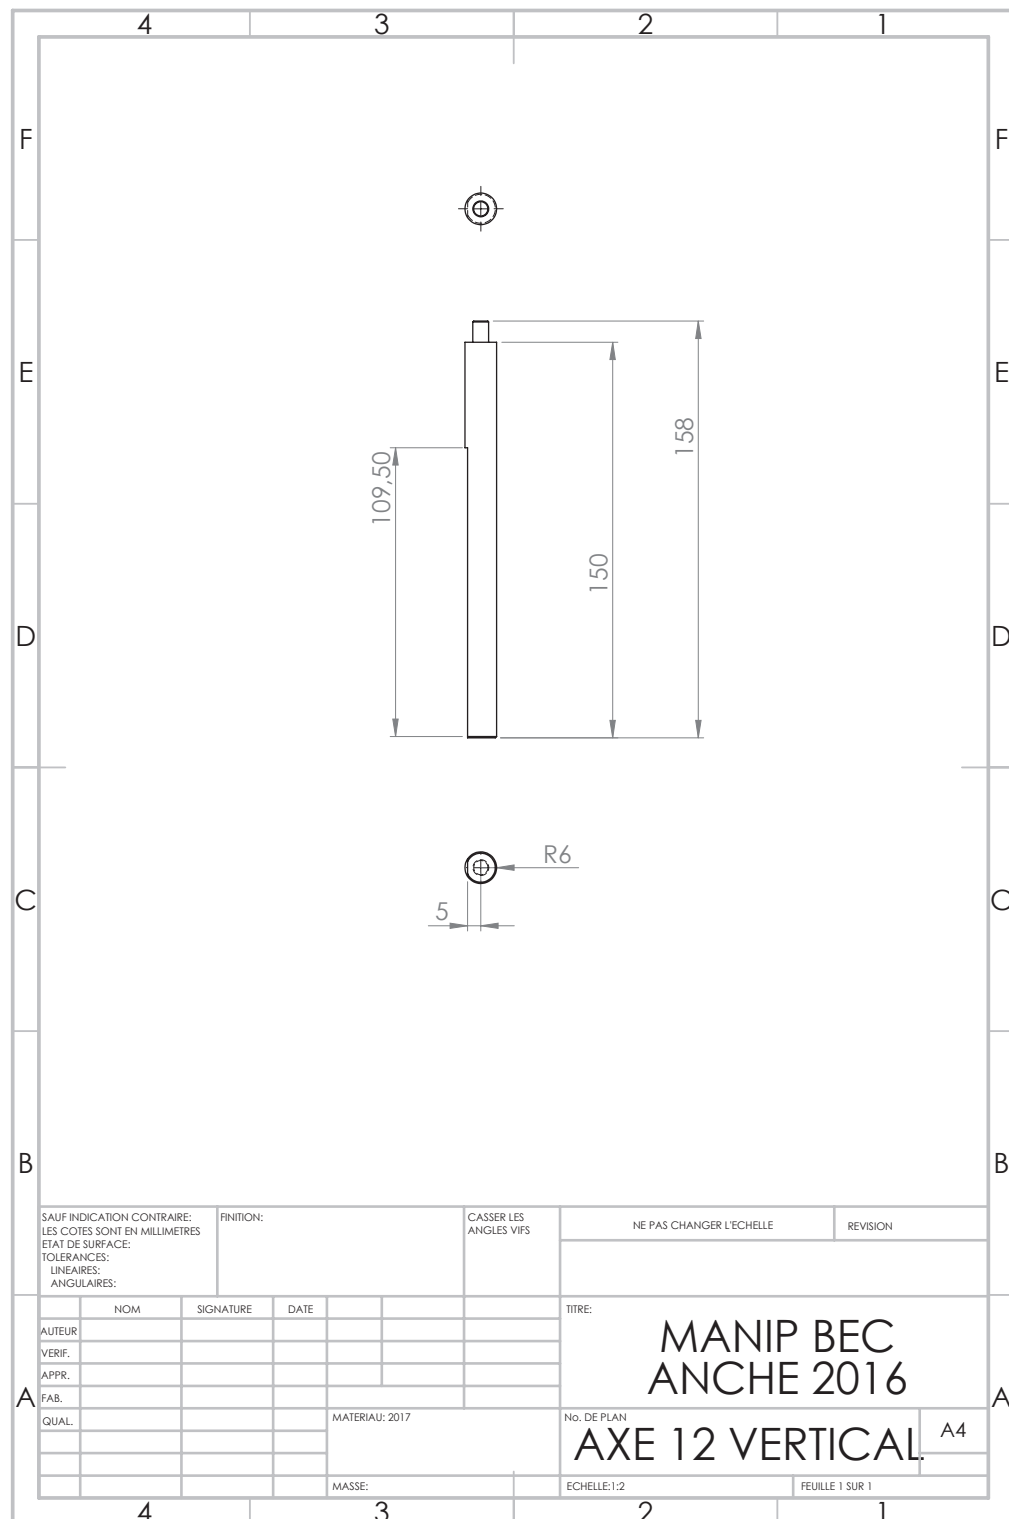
Dimensioned drawing of the principal axis of the supplementary sensor support (18). Provided by LAUM mechanical workshop.
